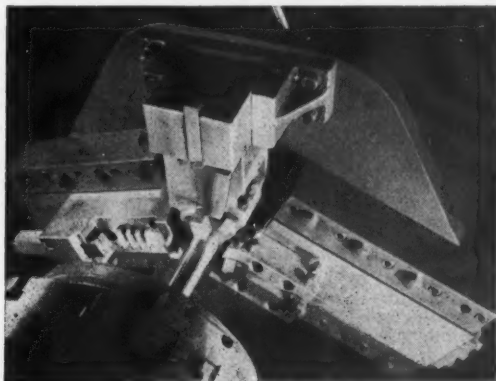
2nd operation: 15 modern cutting tools held in 3 radial slides—turning, facing, forming, recessing and chamfering operations.
